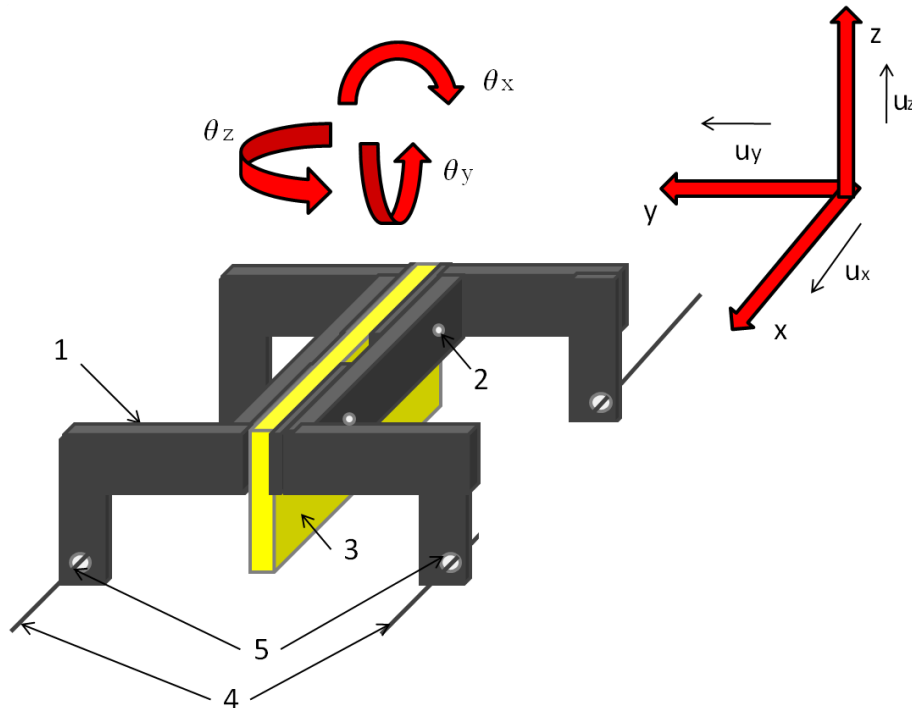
Plate holder; 1: plate support; 2: screws; 3: plate; 4: stainless steel cables; 5: stainless steel cable passage.
